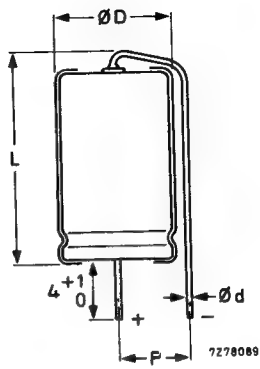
Style 3; see Table 1b for dimensions d, D, L and P.
